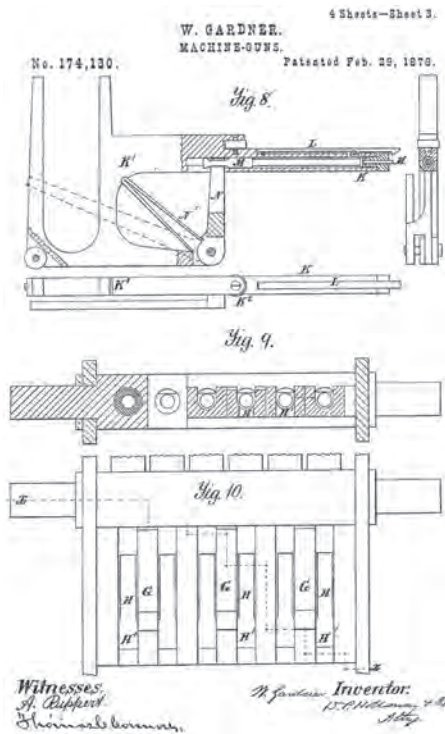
Gardner's 1st Patent. Note the U-shape bolt, V-spring, and hammer firing mechanism. Photo credit: Author's library.
